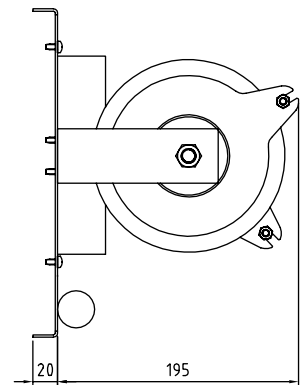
Dimension drawing of a three phase high impedance resistor unit
